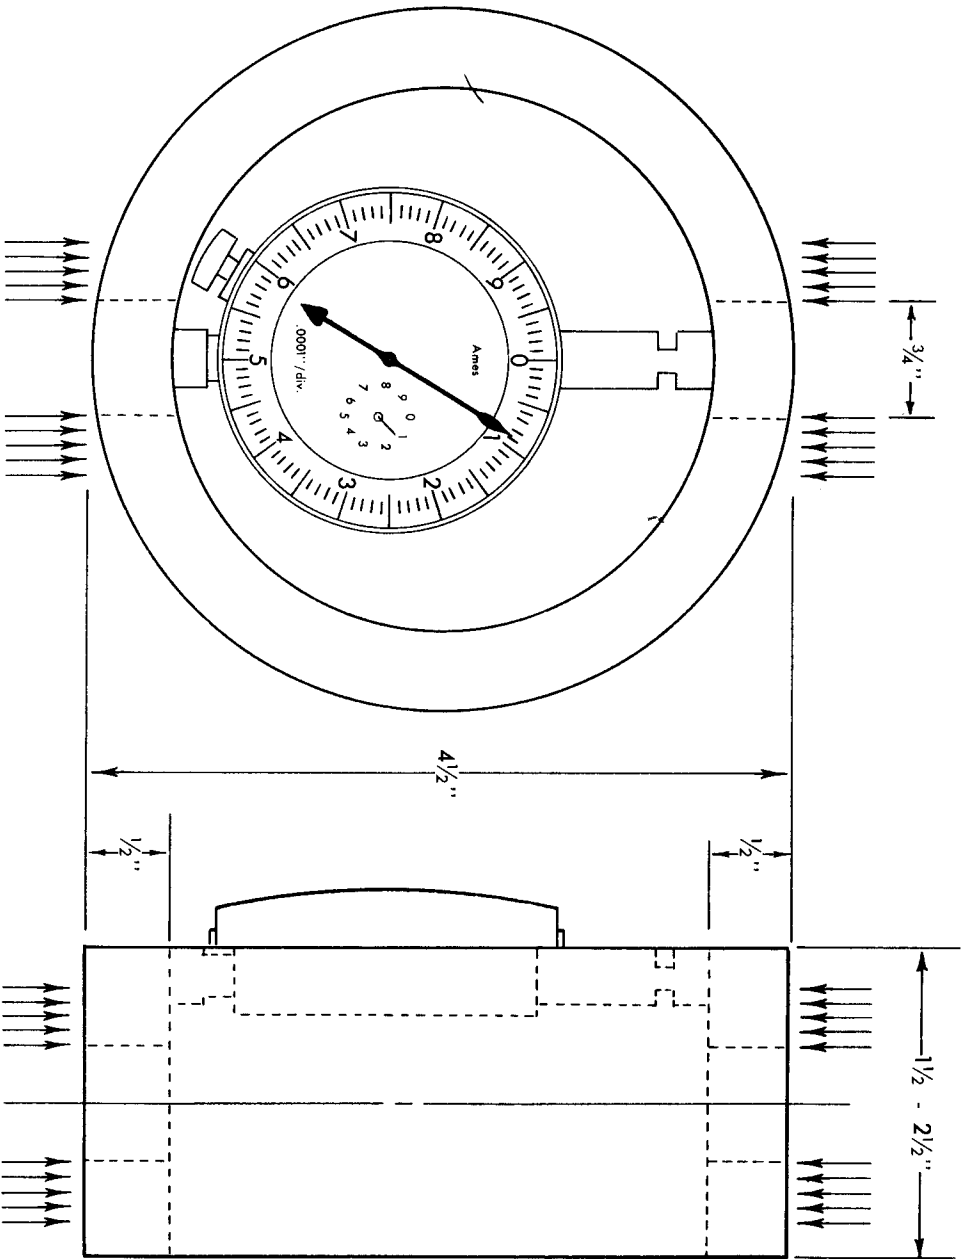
RING-SHAPED BOLT LOAD INDICATOR FOR MEASURING TENSION IN ROOF BOLTS
